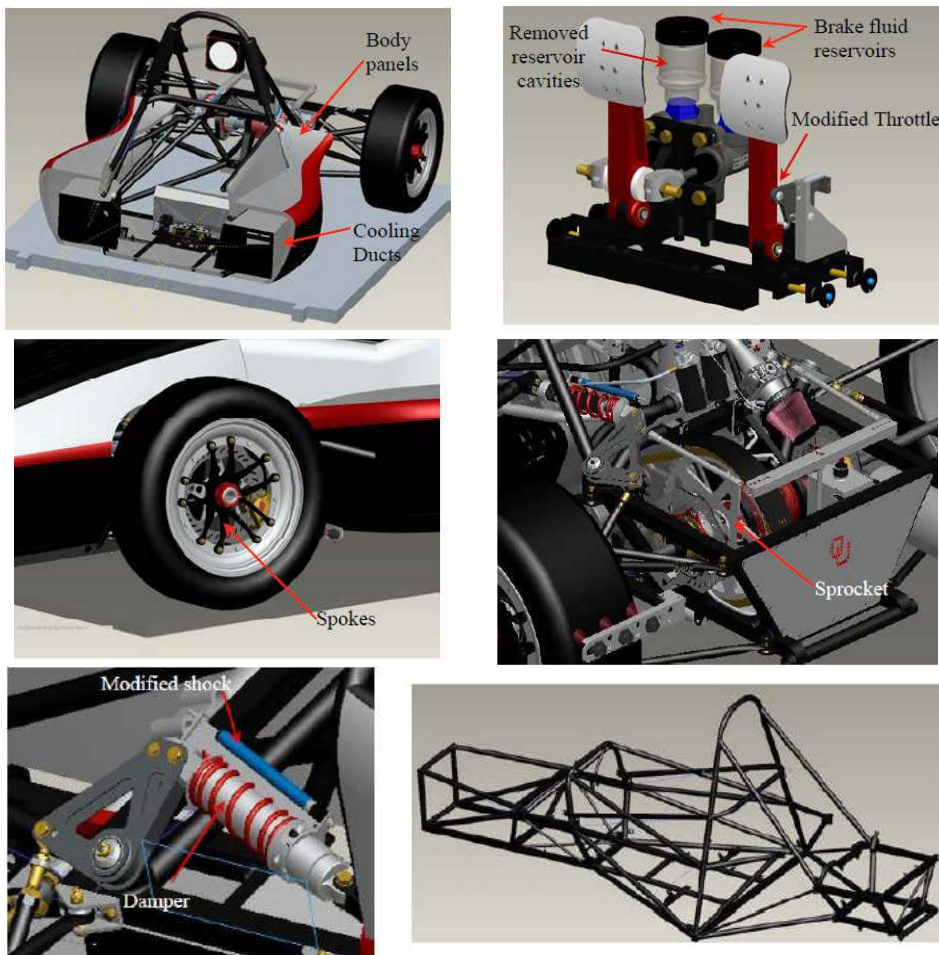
Parts and assemblies removed or modified: (a) Body panels and thin shell parts thickened, (b) Brake system, (c) Spokes of the wheel center, (d) Sprocket of the transmission, (e) Shock and damper, and (f) Solidified frame tubes.
